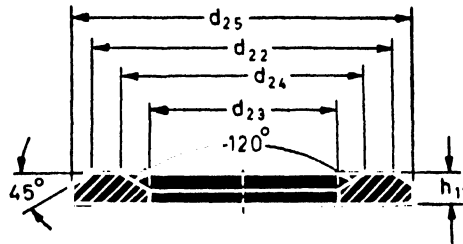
STEM SUB-ASSEMBLY (630, 1 000, 2 000 AND 3 150 A RATING)
